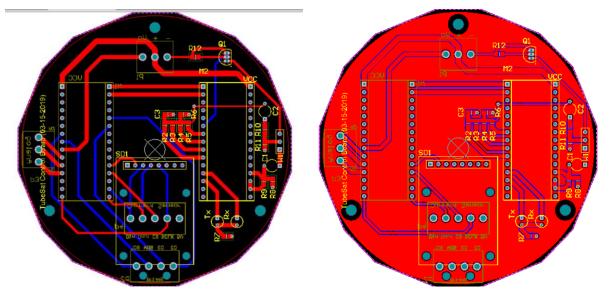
, c) PCB Layout of the Controller Circuit without the Power Plane (Left) and With the Power Plane (right)
